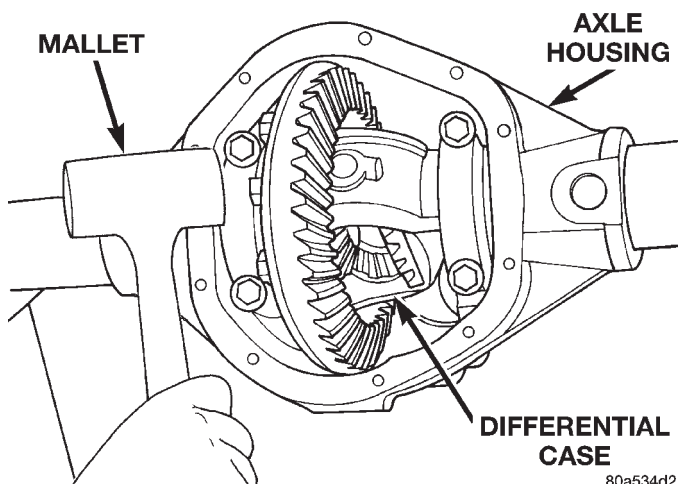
Seat Pinion Gear Side Differential Dummy Side Bearing
